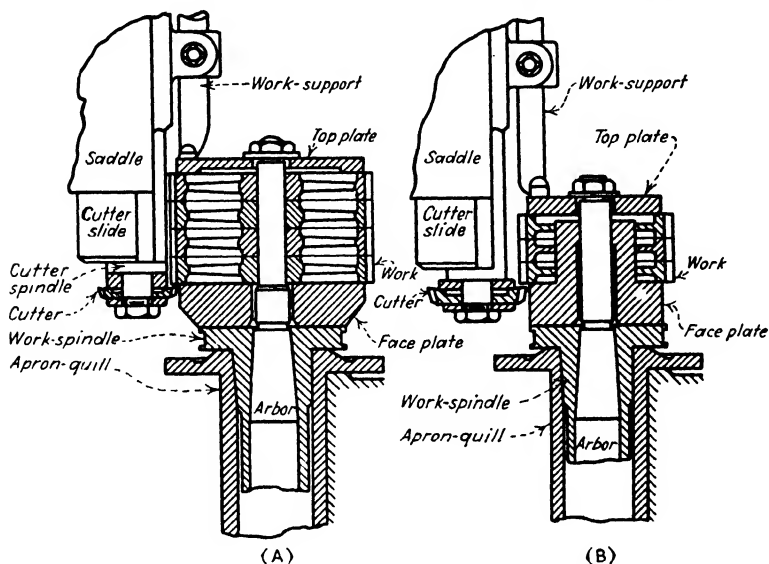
Two methods of stacking gears. A shows gears held on mandrel while B uses a special face plate.
